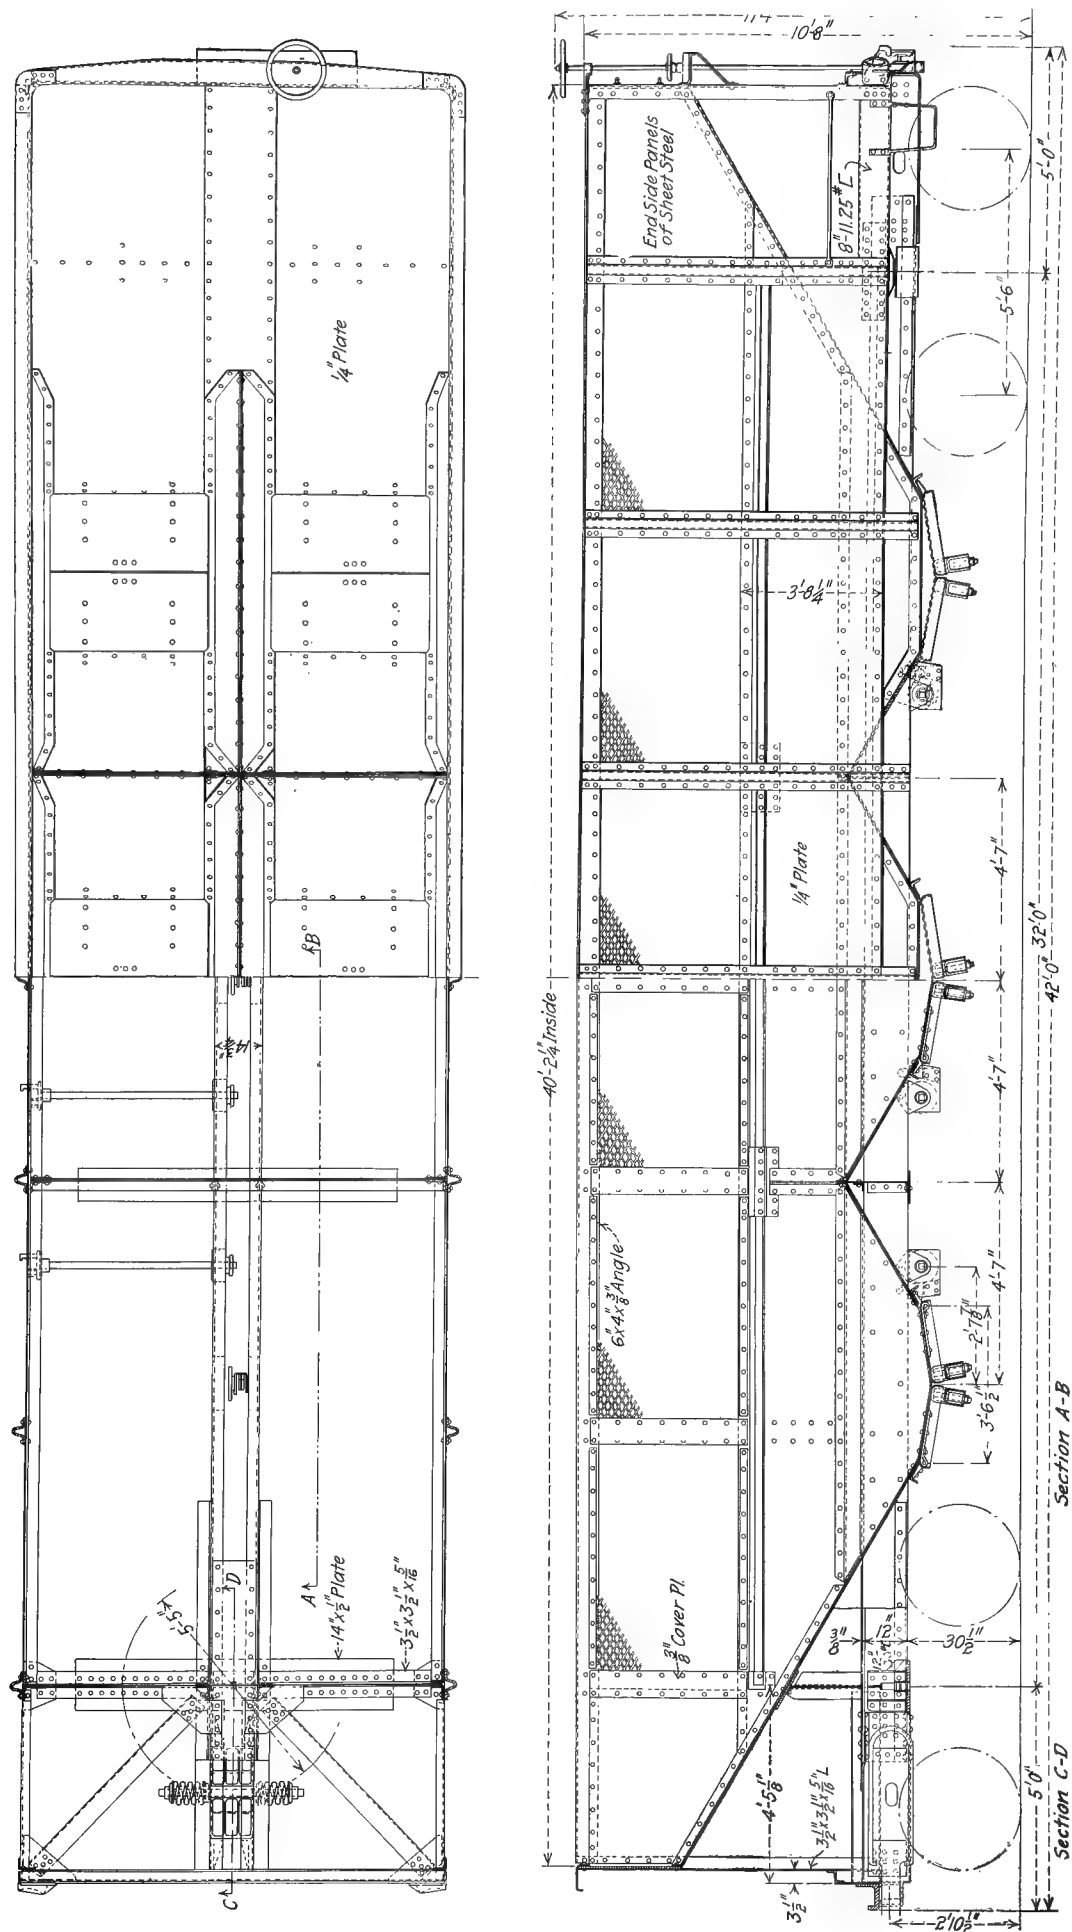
New York Central All-Steel 40-Ton Capacity Hopper Coke Car Shown in Figs. 33 and 298. Builder, American Car & Foundry Company.
